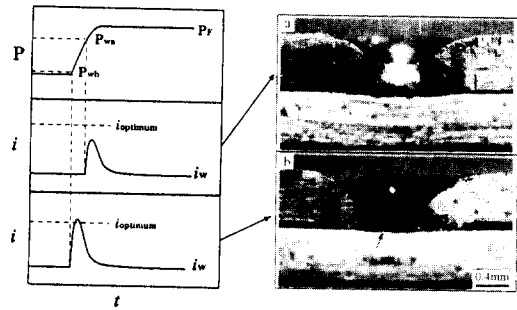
Effect of welding pressure (discharge point) on weld formation
